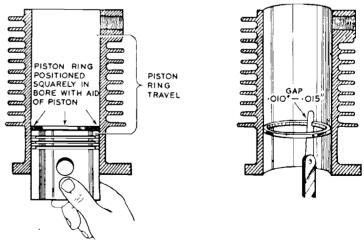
(LEFT) PISTON RING GAPS SHOULD BE CHECKED WITH RING SQUARE IN THE BORE AND AT THE LOWER END OF THE RING TRAVEL. (RIGHT) CHECKING GAP WITH FEELER GAUGE.
